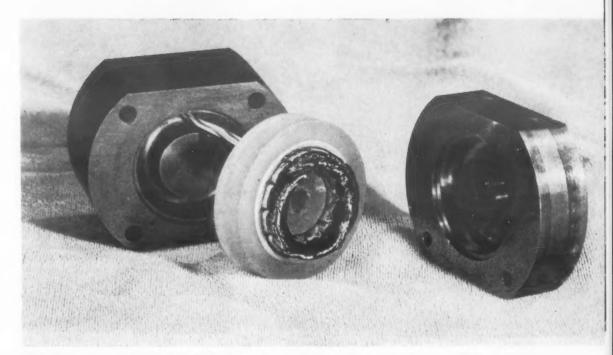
Inner and outer seals on stator keep resin away from critical areas and prevent air leakage during vacuum casting.
